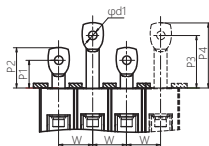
NXM-400~800 rear wiring overall and installation dimension
